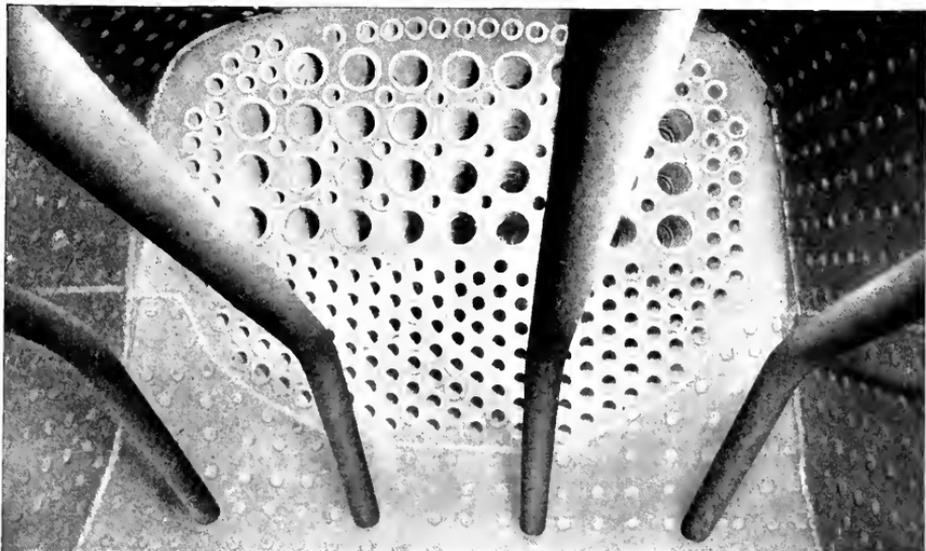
Back Flue Sheet, Locomotive Fire Box: Tubes and Superheater Flue Beads Welded to Sheet: Patch Applied on Crown Sheet: Side Sheets and New Half Flue Welded in Place by Arc Welding
